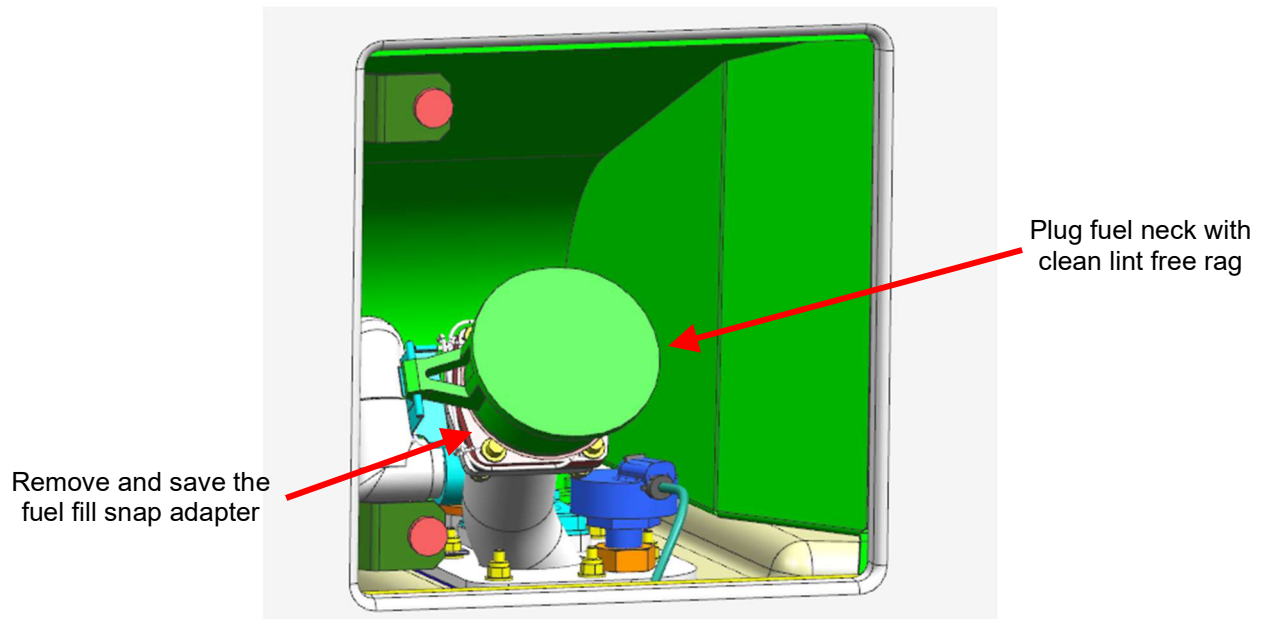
Fuel Snap Adapter Removal (Access Door Removed for Clarity)
